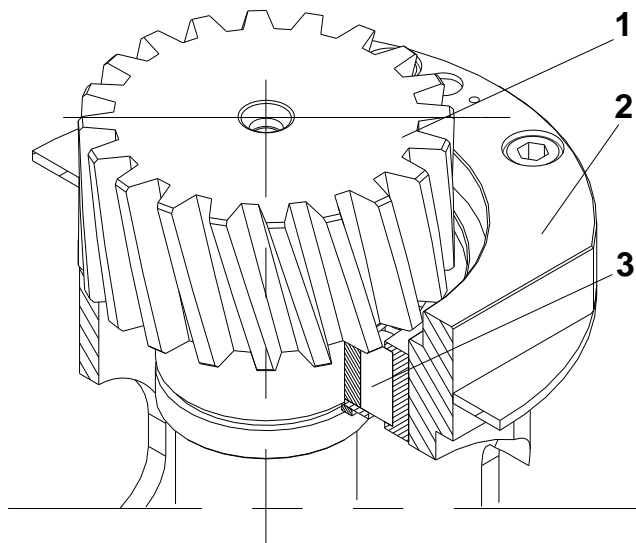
Simple pinion for driving the toothed wheel of vertical lathes.
